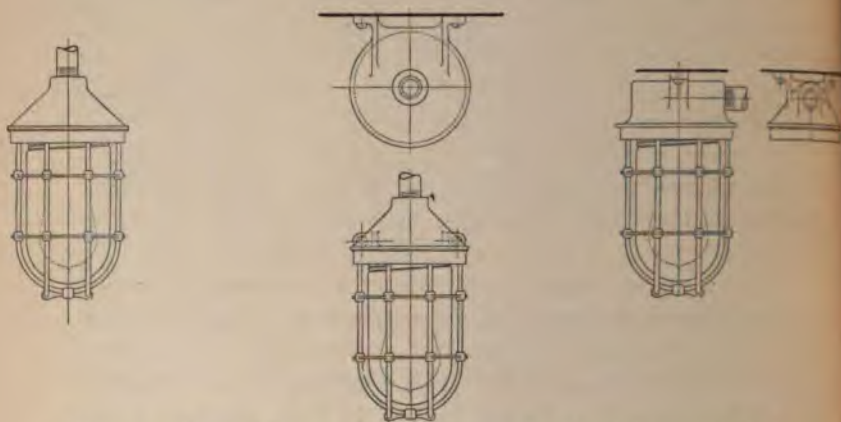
From left to right; drop fixture, bulkhead fixture, deck fixture.
